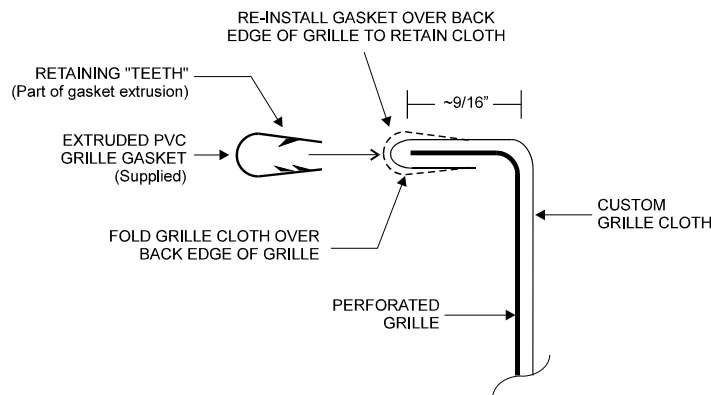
INSTALLING A CUSTOM GRILLE CLOTH
